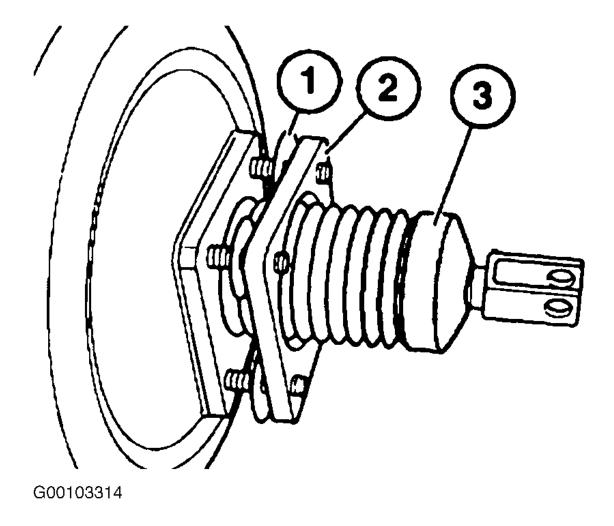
Locating Brake Booster Components Courtesy of BMW OF NORTH AMERICA, INC.
